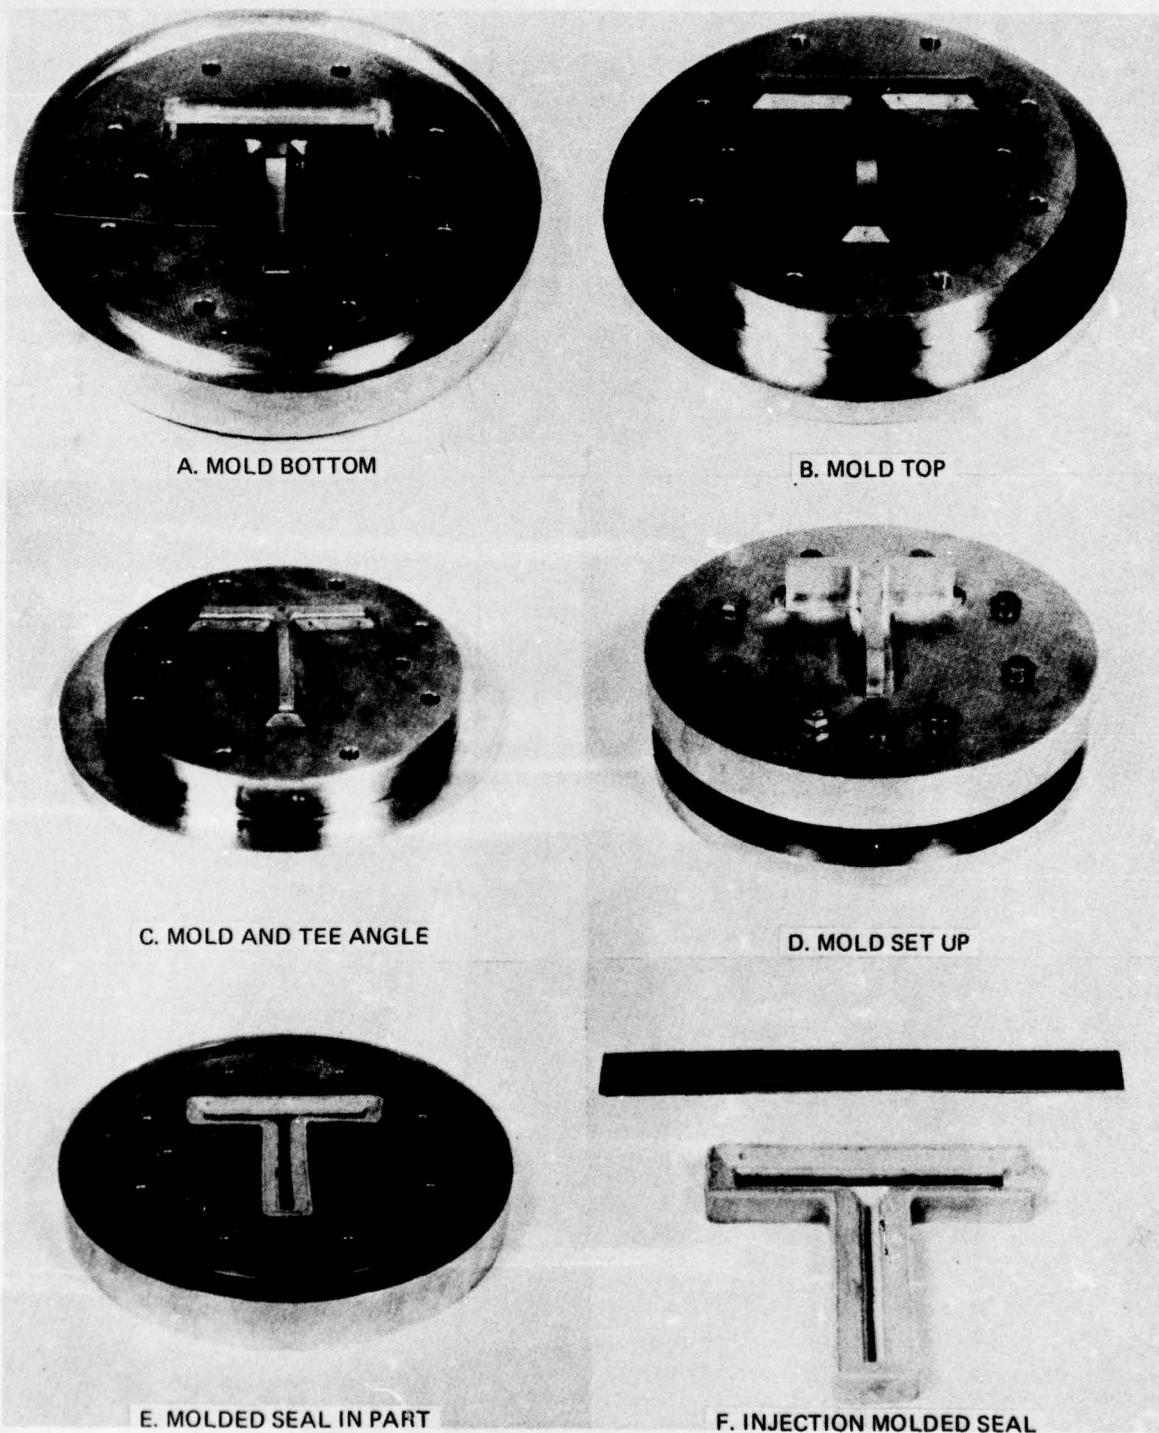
Components Used to Mold Silicone Rubber Tee Seals
